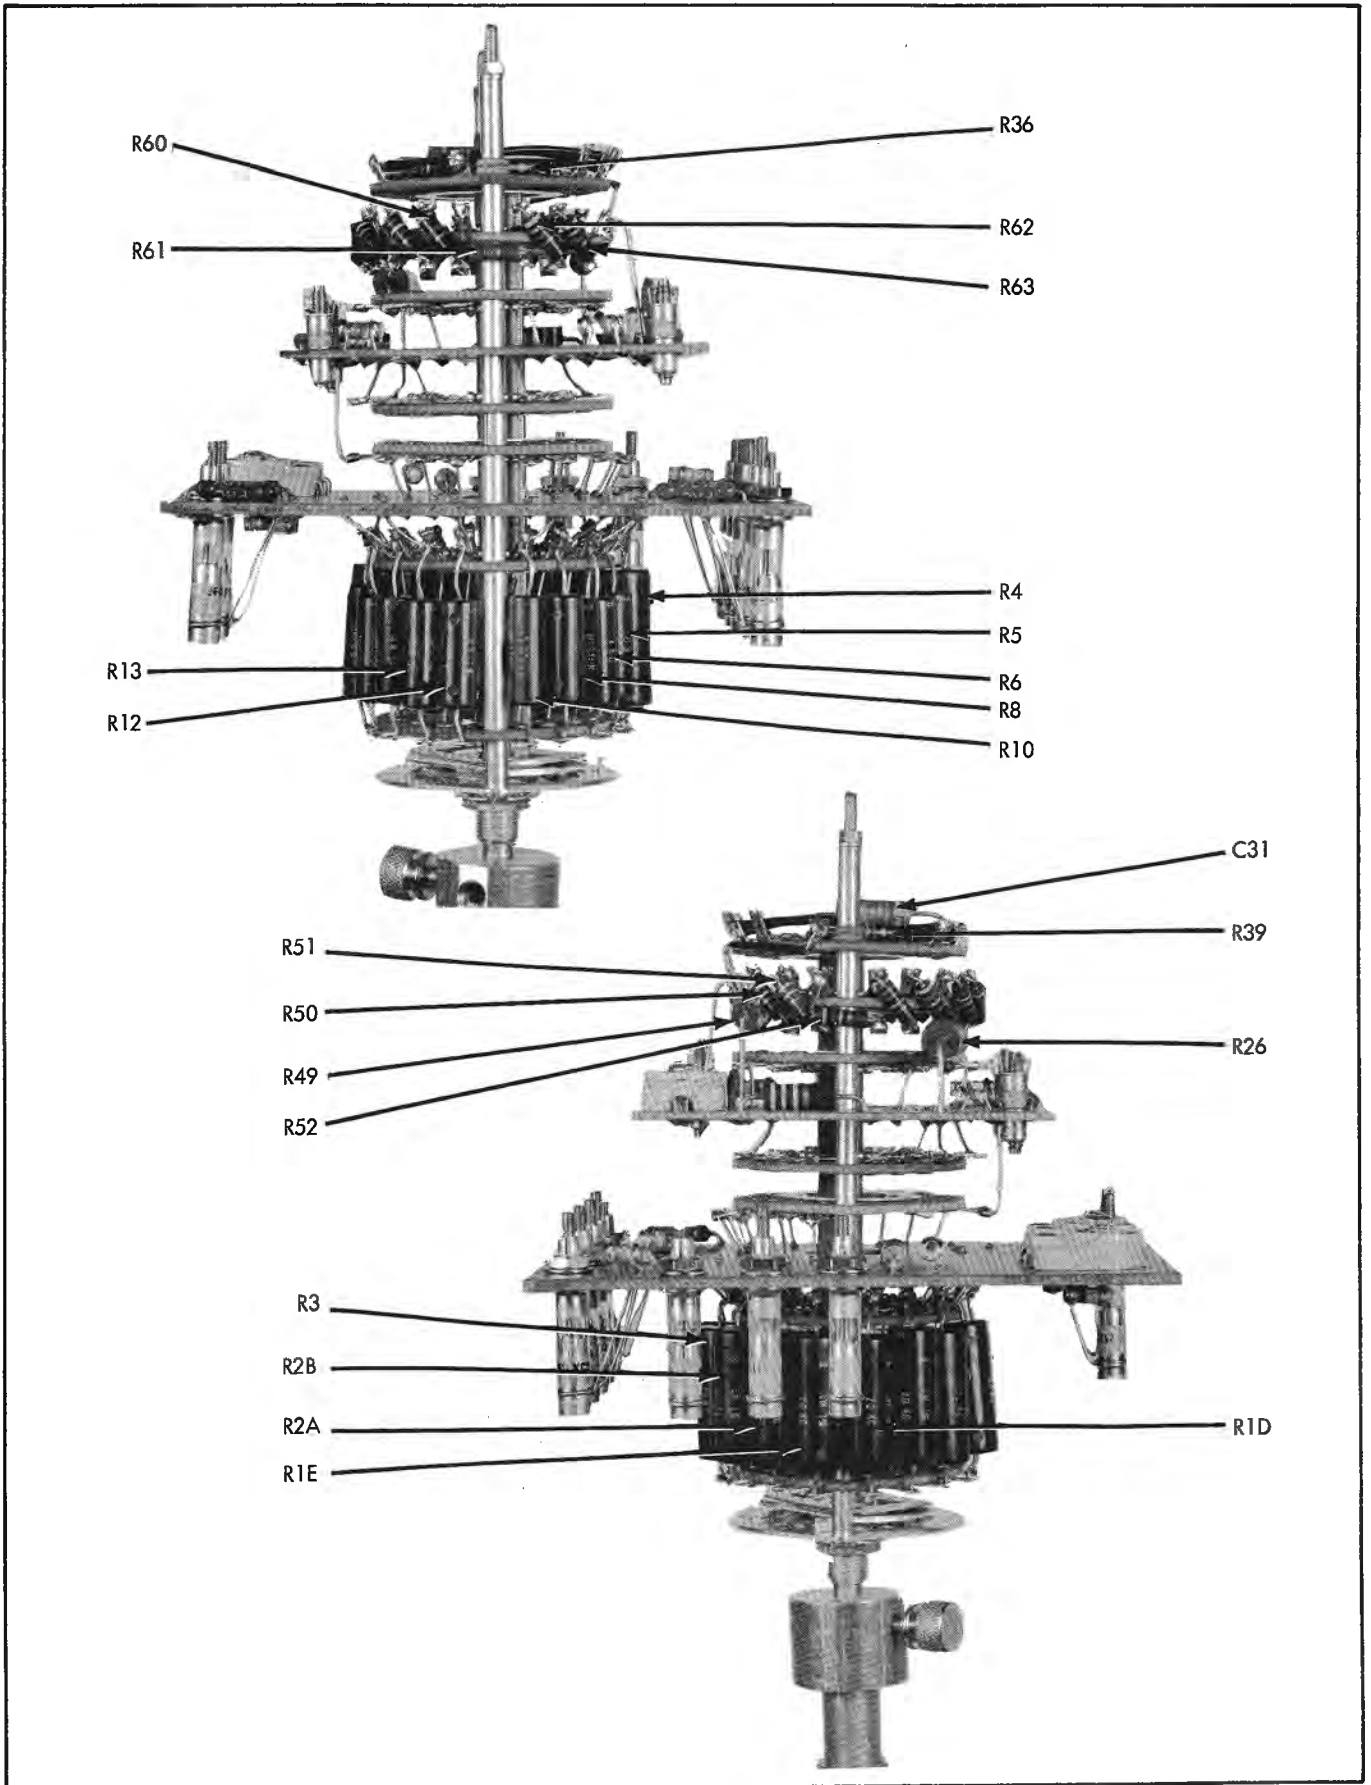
C. RANGE SWITCH DECK ASSEMBLY (Sheet 1 of 2)
